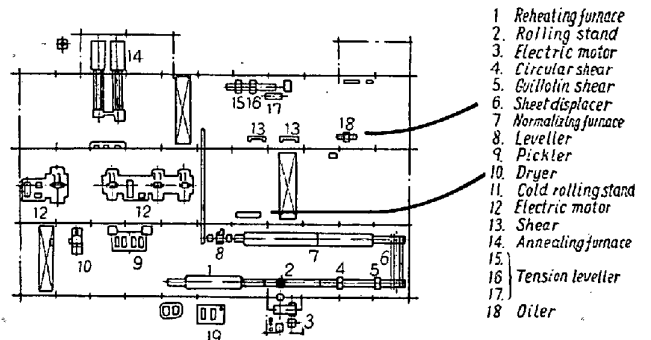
Layout of ordinary finishing sheet rolling mill.
